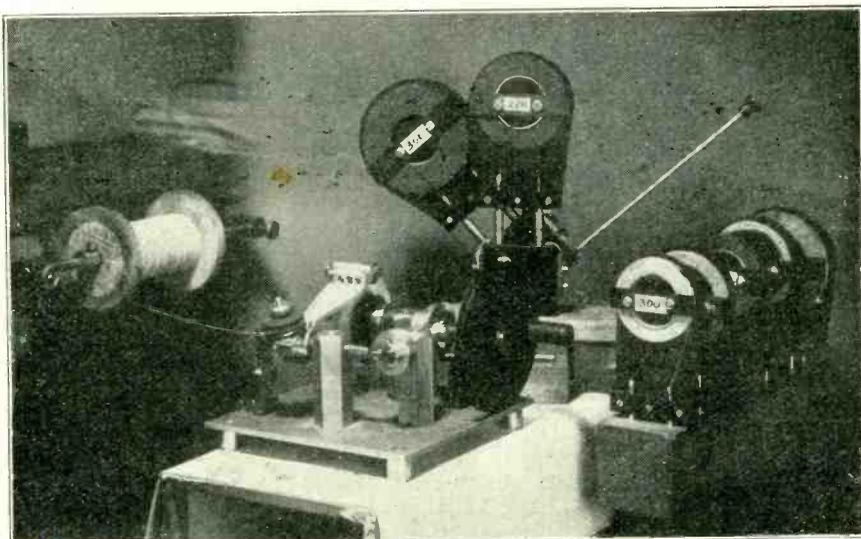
The coil winder in operation showing a number of completed coils supported in suitable mountings.
